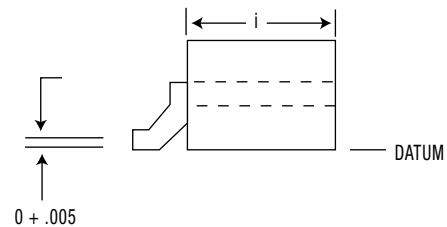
Surface Mount Tolerance for Components with Tabs
